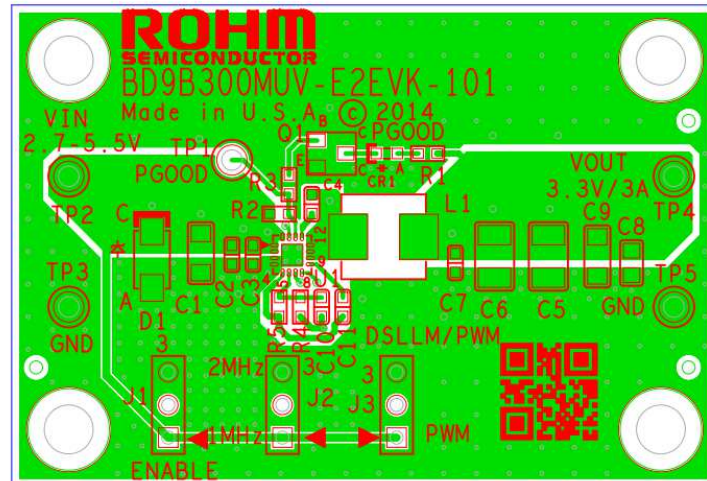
BD9B300MUV-E2EVK-101 Board PCB layout
